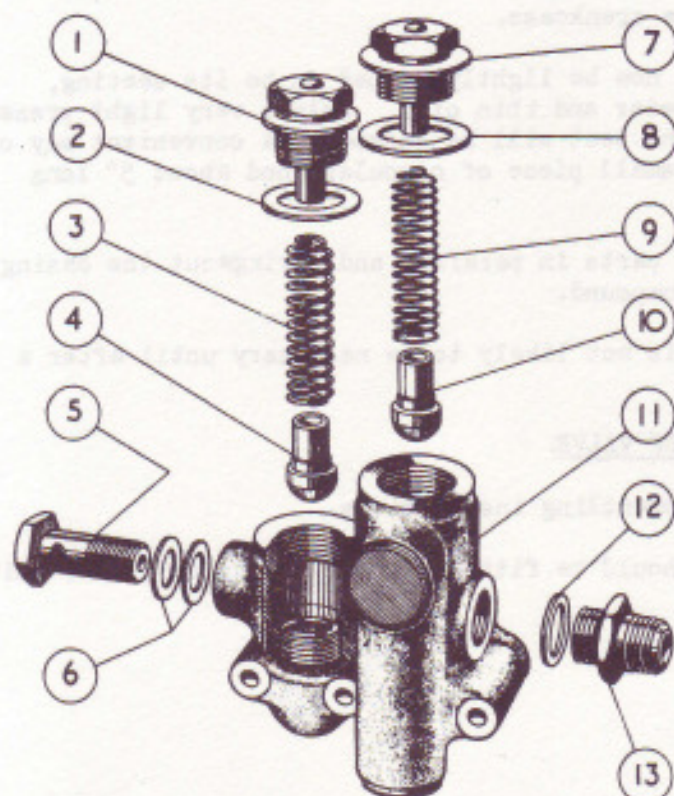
EXPLODED VIEW OF OIL PRESSURE RELIEF VALVE UNIT.
